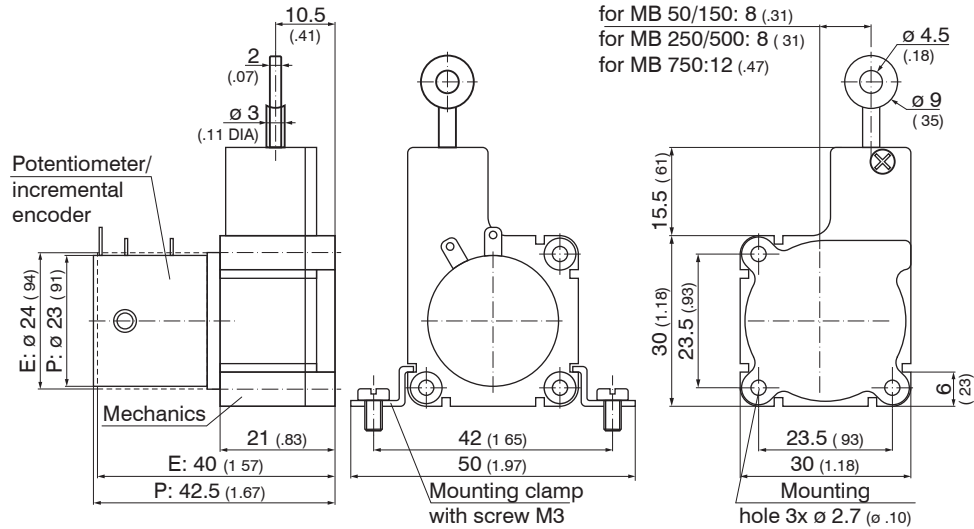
Dimensional drawing WPS- ... -MK30 with potentiometer or encoder, dimensions in mm (inches), not to scale
